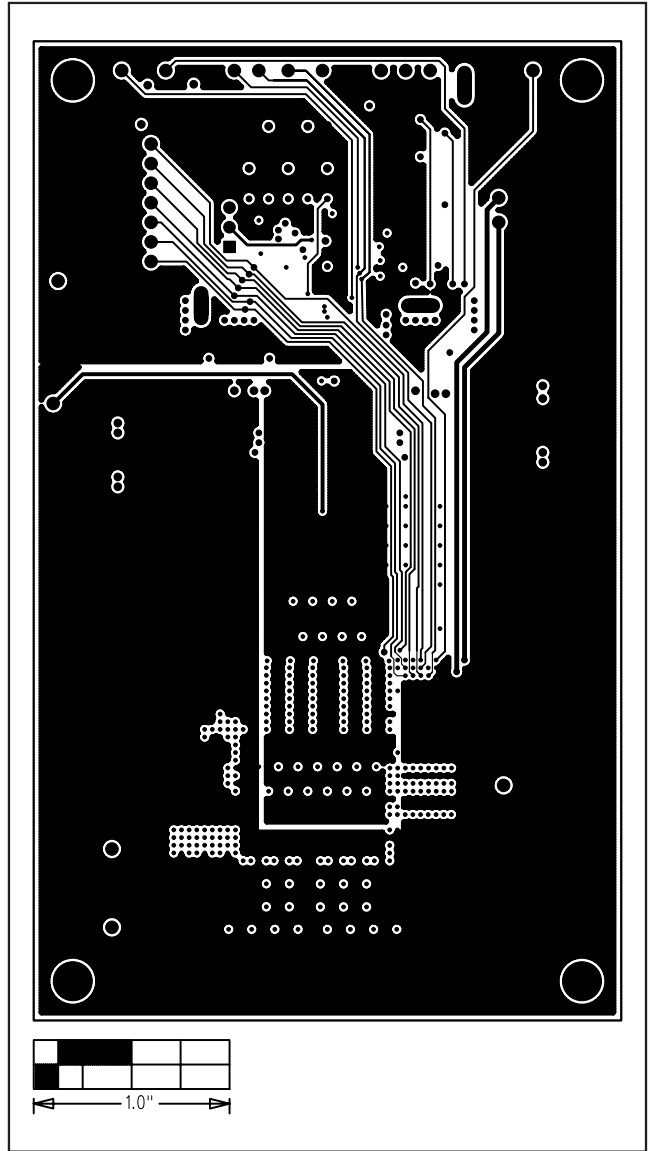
MAX17082 EV Kit PCB Layout—Internal Layer 3 (Signal Layer)
